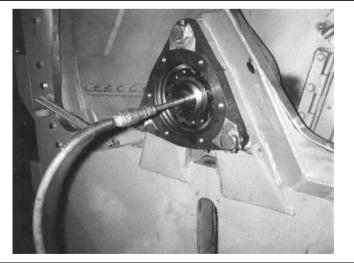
(MSSM0303AE) Connection From Hydraulic Pump to Assist in Bearing Removal
